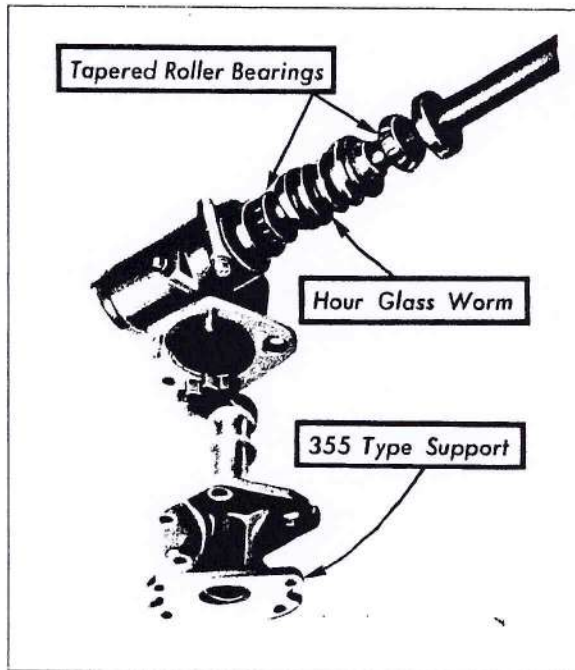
The steering gear on both cars is the same type as on the V-16, but is not as heavy.
